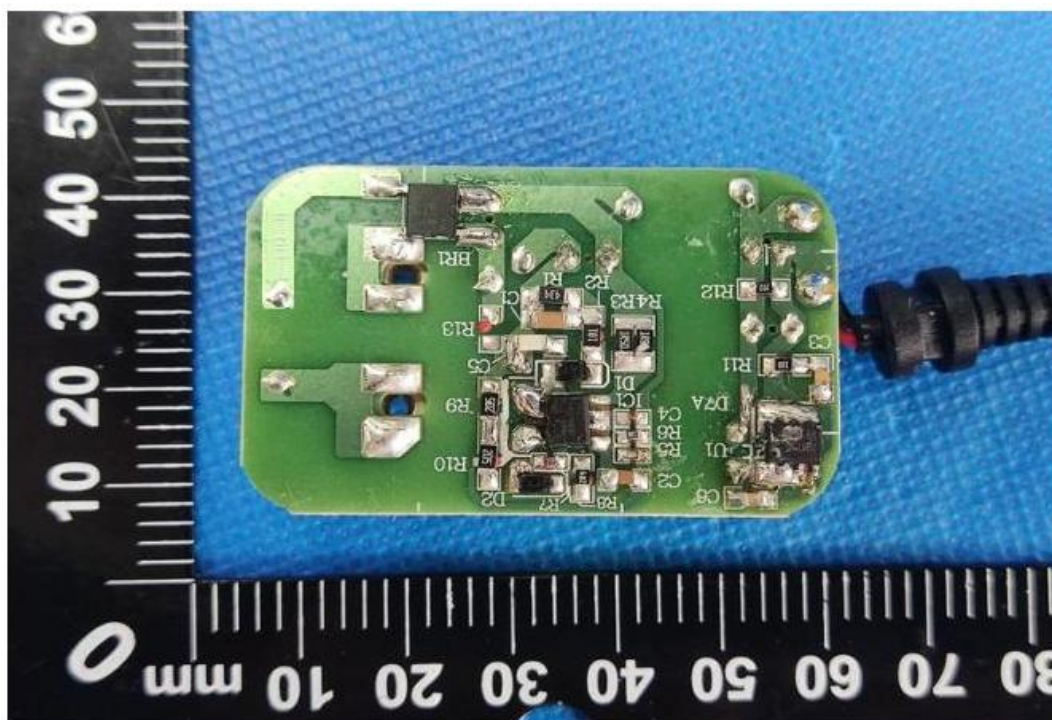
PCB view with U1+C6 (without D7A), for PCB layout PCB-T594-K
